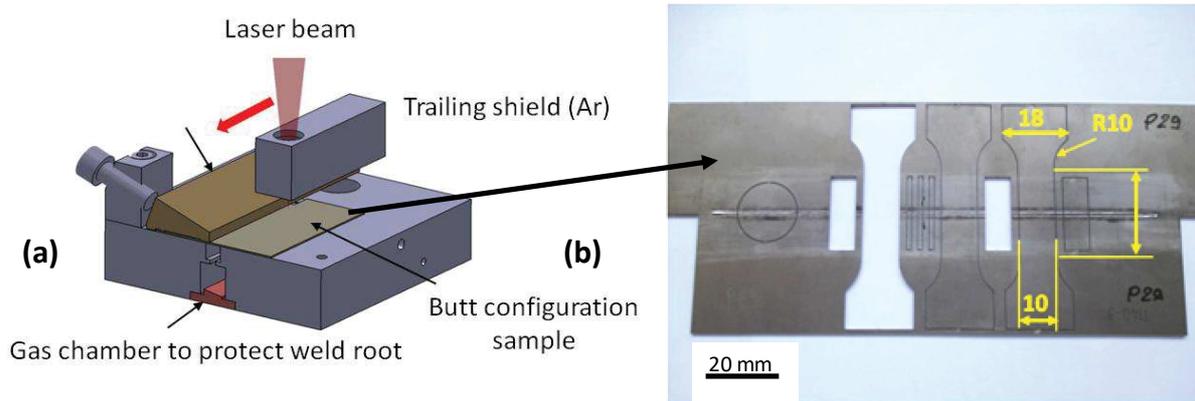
Experimental set-up, (a) Laser welding fixture, (b) localization of metallographic and tensile test sample.
